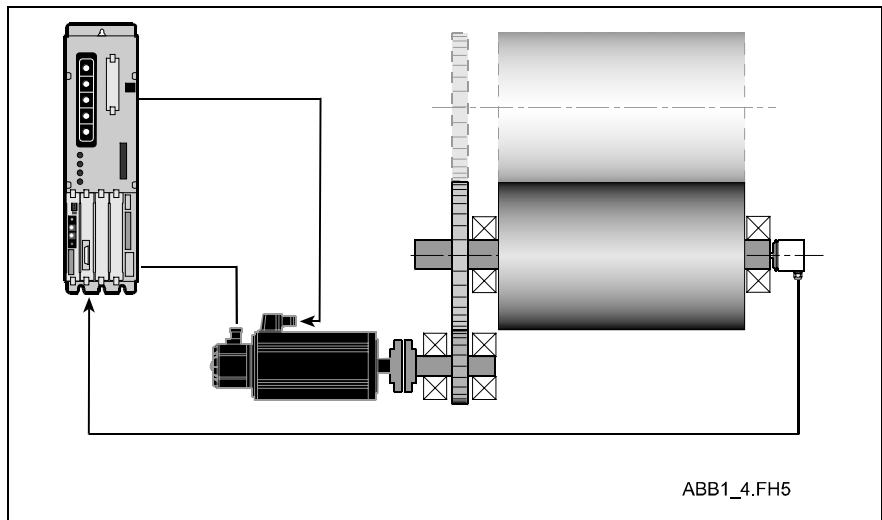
Axis drive with gear and direct measuring system, e.g., press roller
